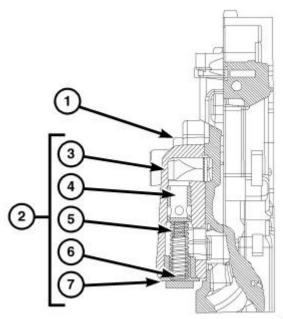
Oil Separator Cover Courtesy of CHRYSLER LLC
